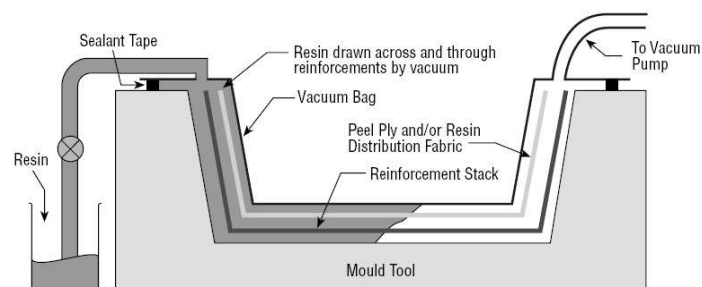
Schematic View of Vacuum Assisted Resin Transfer Molding Process [2, 3]
